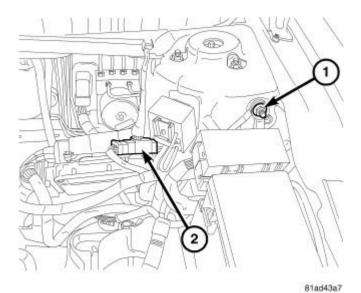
BATTERY CABLE Courtesy of CHRYSLER LLC
